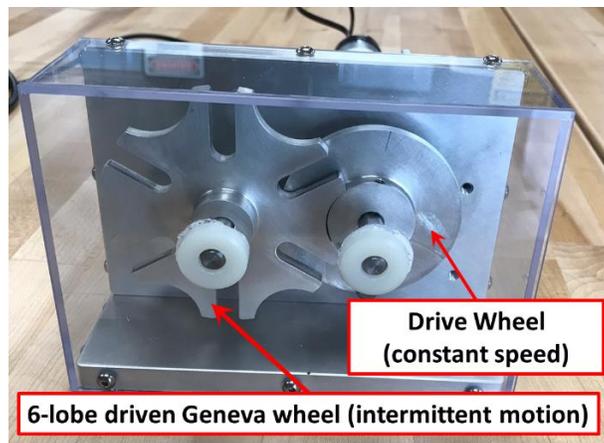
Front view of the completed Geneva mechanism. Drive wheel at right is connected to the electric motor drive mounted at the back and rotates at a constant rate. The six-lobe driven wheel at left moves intermittently.
